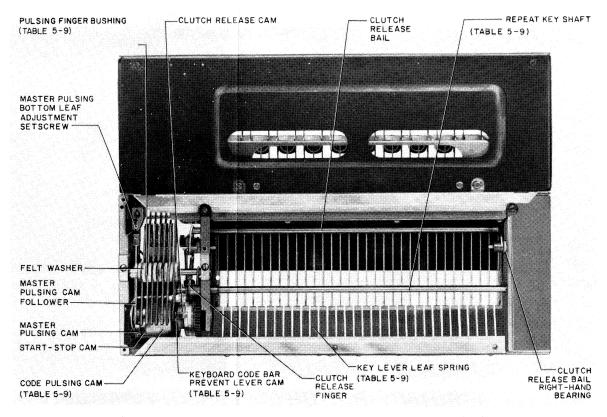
Keyboard Assembly, Bottom View (TT-318A/UG)
